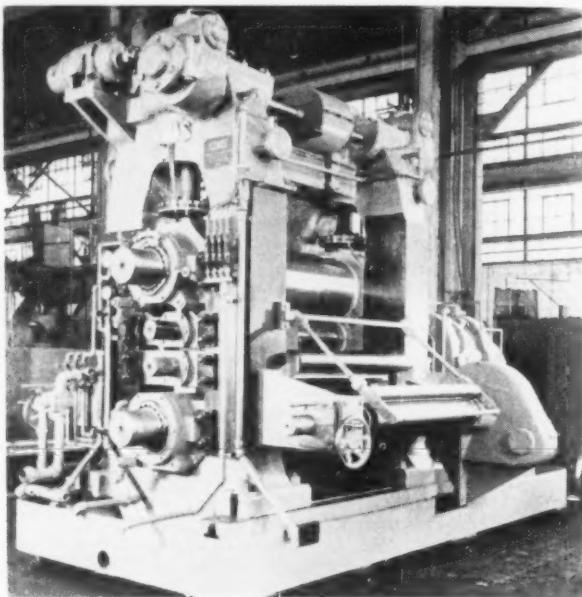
Typical of Lewis Foundry products is this complete rolling mill unit. Most Lewis rolling mills are custom built, requiring that component parts be produced in very small lots. Carbide tools were used on 90% of the machining operations.
